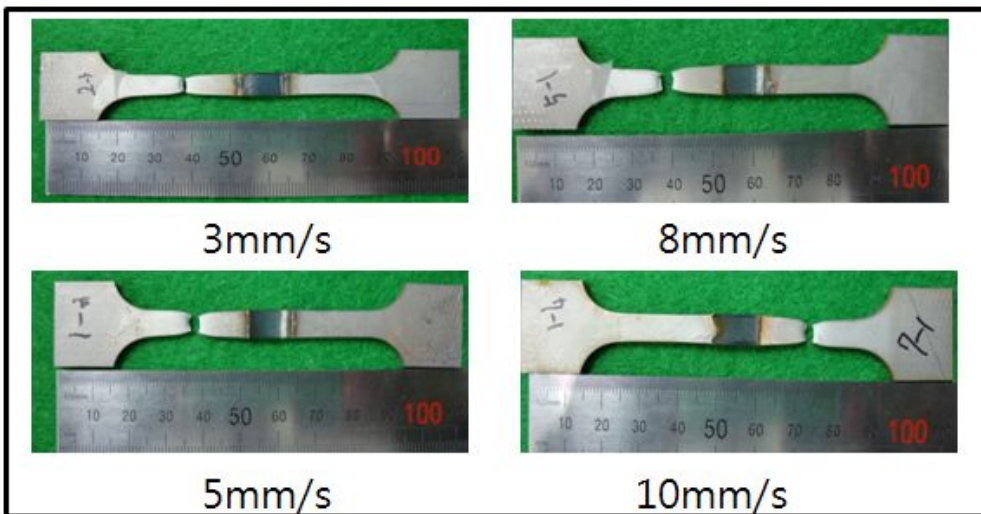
4 Fractured specimens after tensile test\_Rotation speed 600RPM
